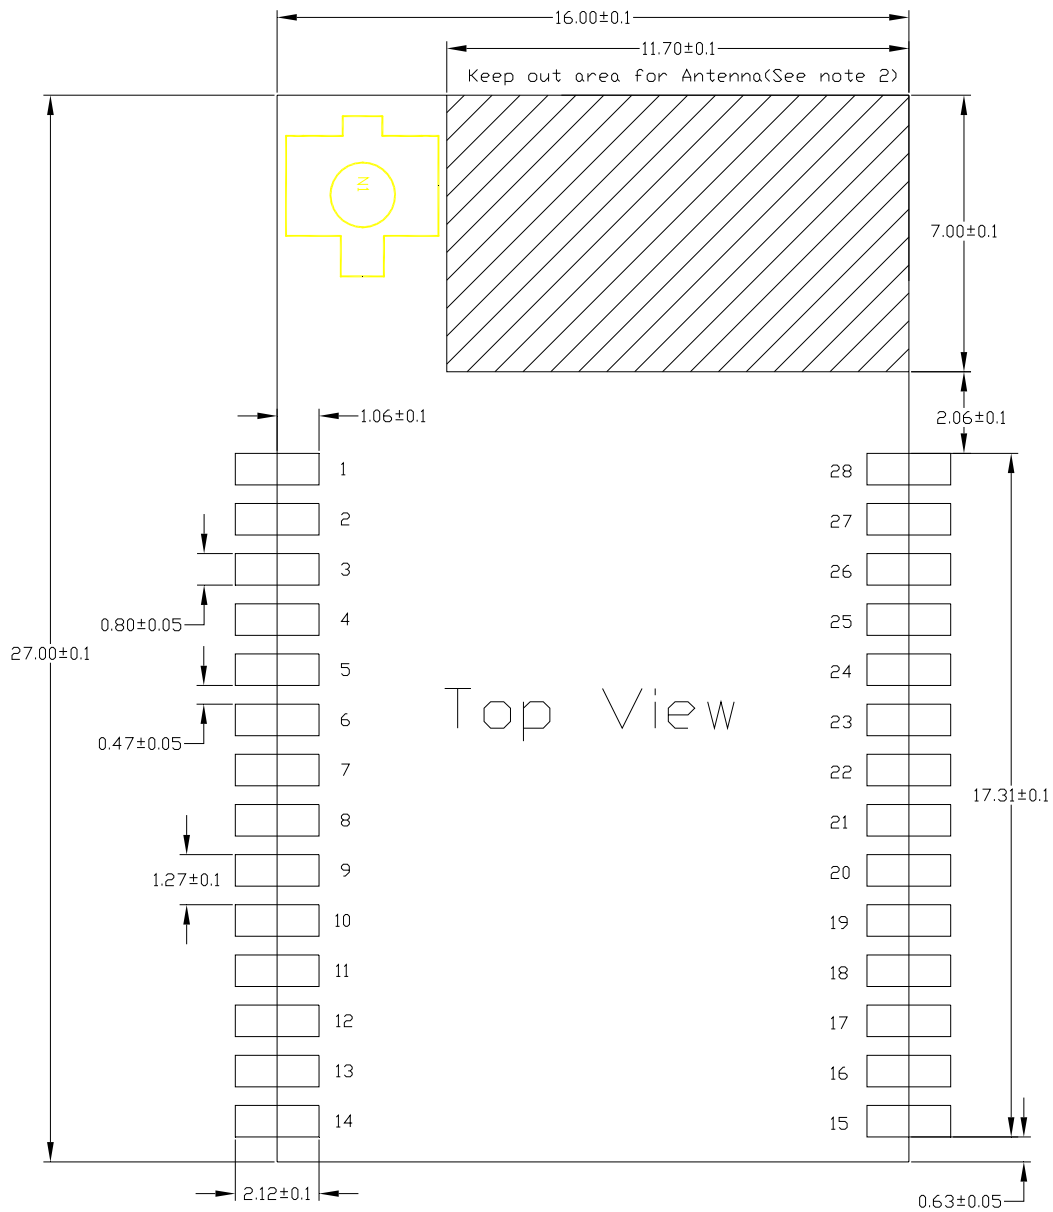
DFZM-E72xx Module Recommended PCB Footprint (in mm)
